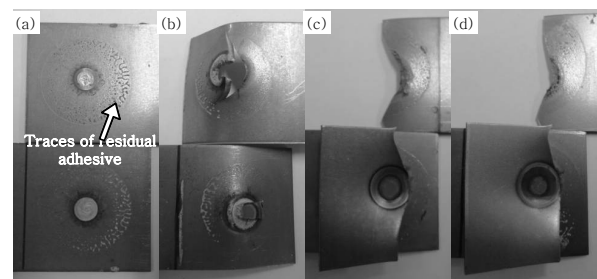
Fracture mode images of resistance spot welded samples with nugget diameter of (a) 4.0mm (b) 5.0mm (c) 6.0mm and (d) 7.0mm
